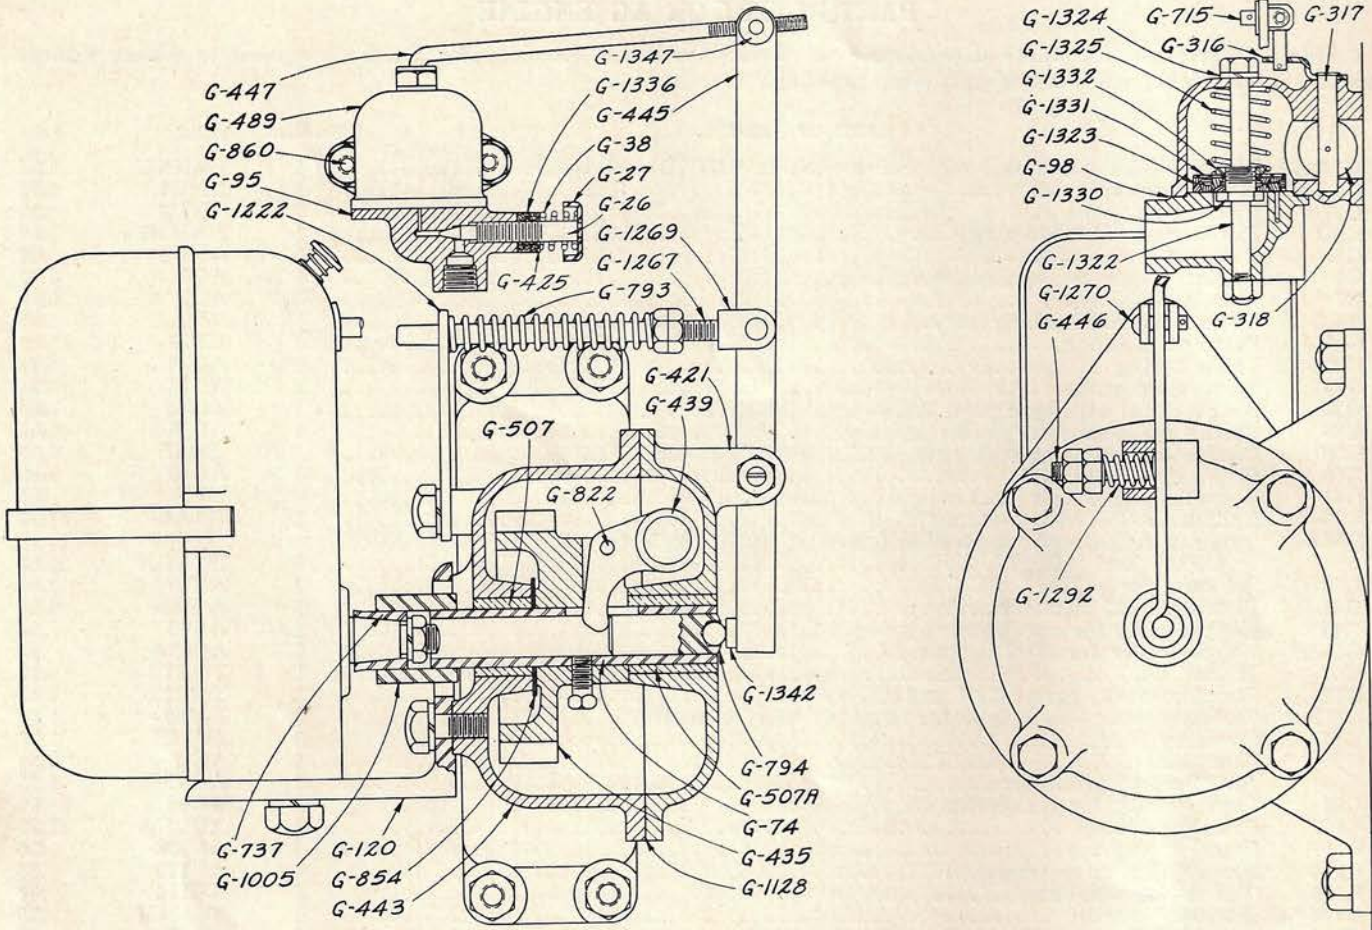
Sectional View Carburetor, Magneto and Governor Assembly AG Engine
